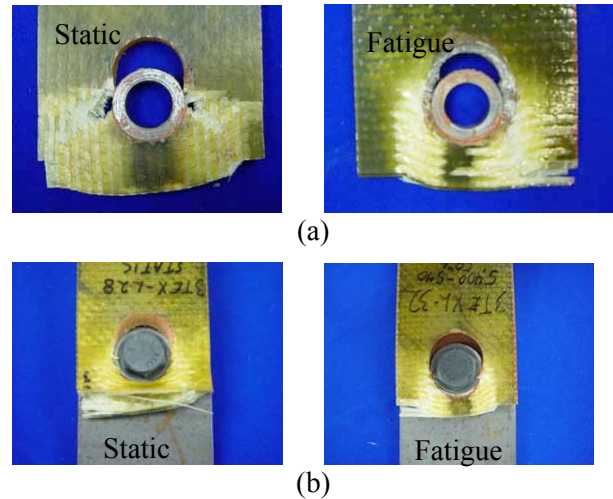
Typical joint static and fatigue failure mode observed for (a) the cylindrical steel insert and (b) the tapered steel insert composite/steel lap assemblies.
